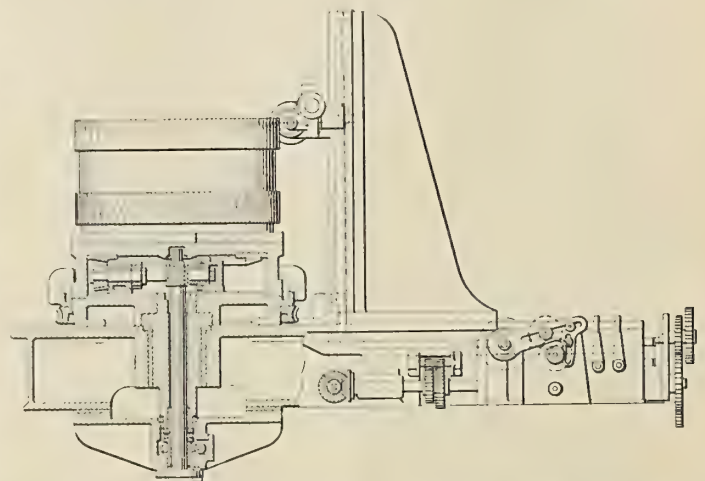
Secondary Table Mounted on Original Table of Gear Cutting Machine and Train of Gearing to Give 5 Percent "Creep"
